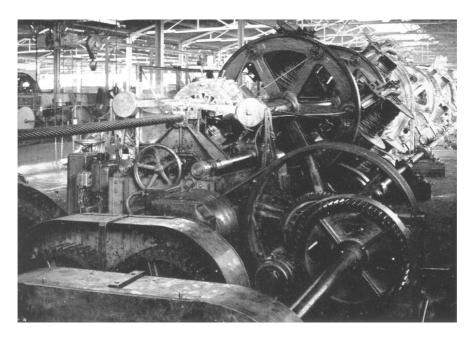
Rope-closing machine. Note the bobbins to the right of the picture and the closing head in the centre [20].
